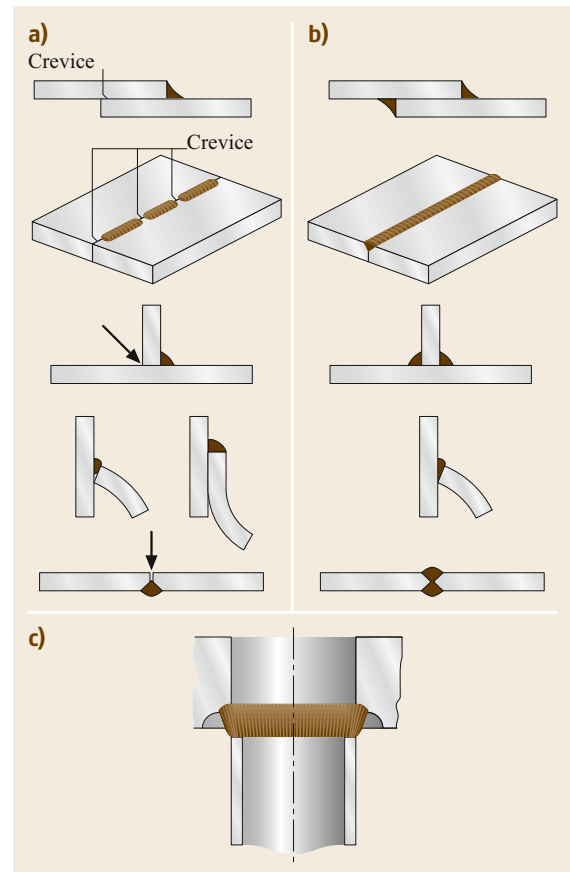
c Examples of welded joints that are susceptible and resistant to crevice corrosion: (a) design that encourages corrosion; (b) design that inhibits corrosion; (c) crevice-free welding of pipes, which improves resistance to stress corrosion cracking (after [16.3])
